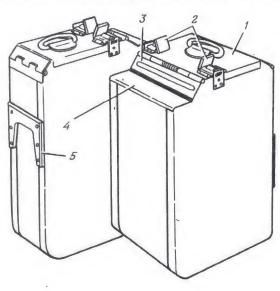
AMMUNITION BOXES $1-cover;\ 2-retainers;\ 3-cover\ flap;\ 4-tray;\ 5-thrust lining.$ Left: machine gun ΠKT ammunition box. Right: machine gun $K\Pi BT$ ammunition box
